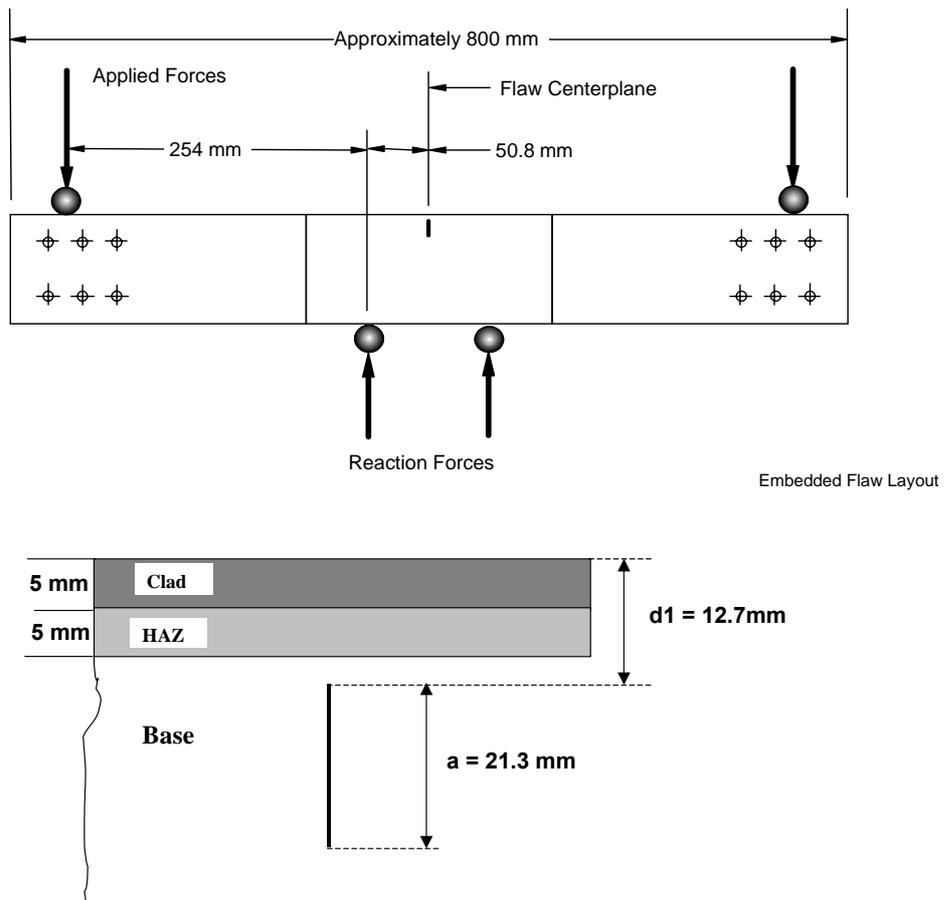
Schematic of the embedded flaw beams with the flaw dimension after fatigue sharpening.
